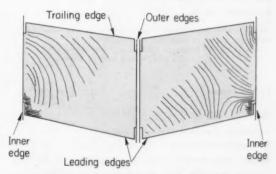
Typical stress cracks in brittle-lacquer coating on most severely loaded strut.
